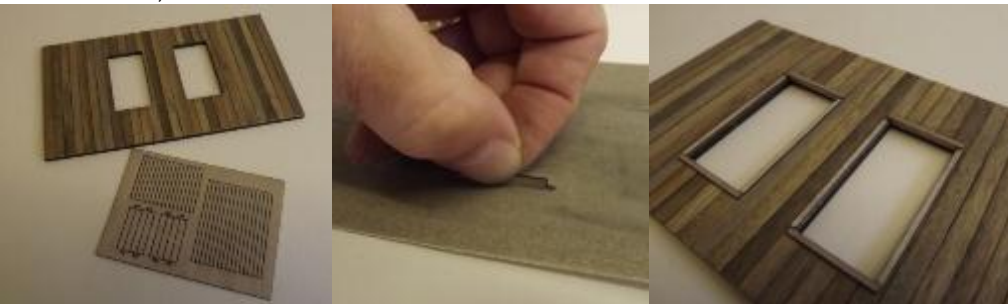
J add battens. Note battens are cut short at the bottom of the wall
